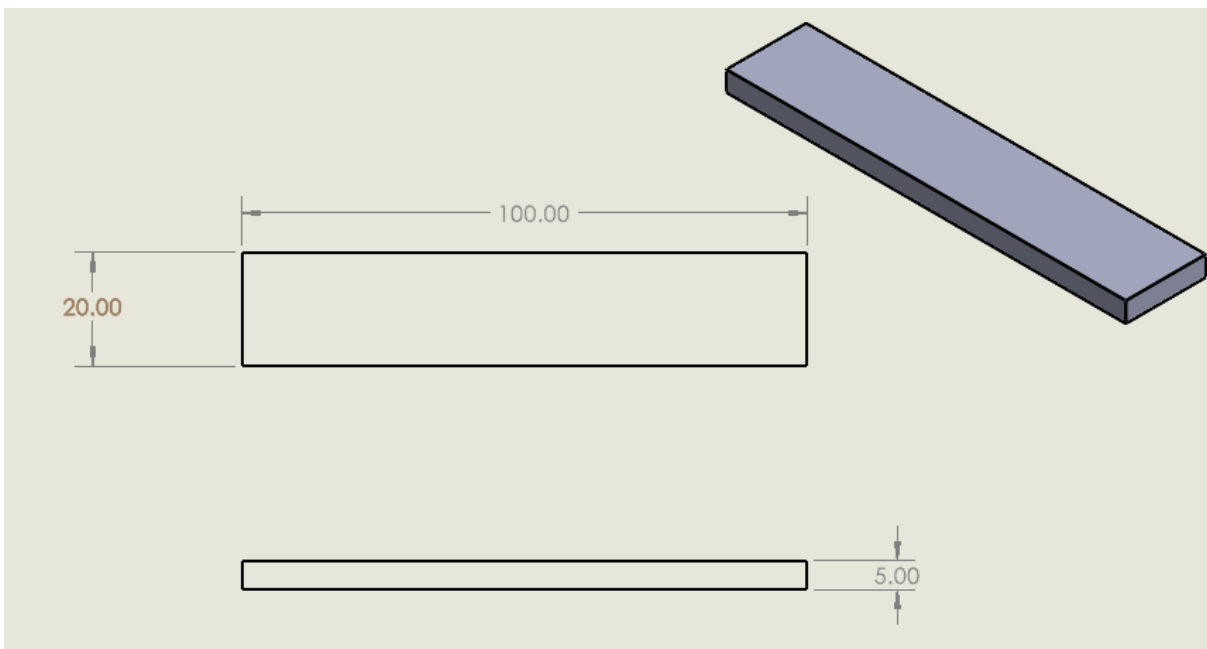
Schematic of flexural testing sample with dimensions from ASTM standard D790-17.
